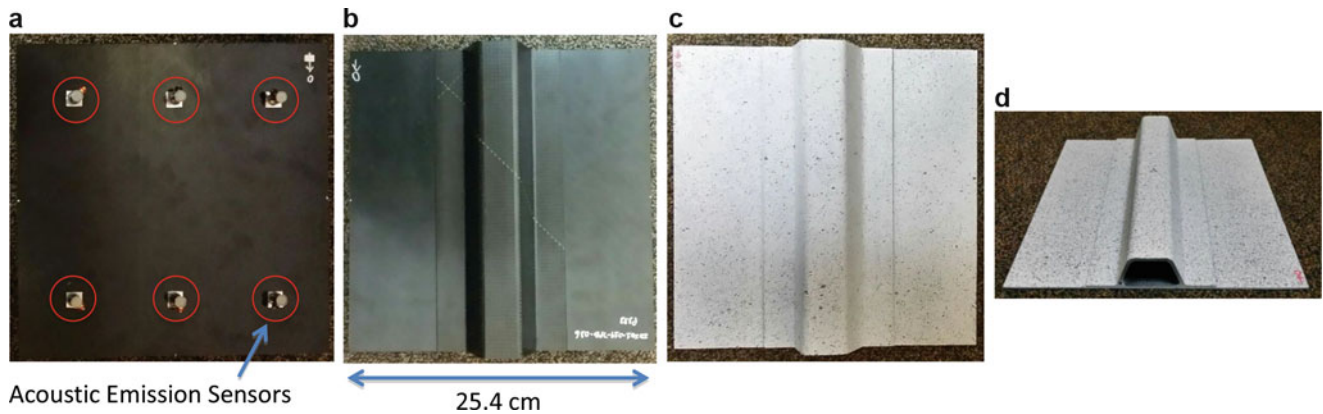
Single stringer composite panel with acoustic emission sensor locations. (a) Flat side, (b) Stringer side, (c) Stringer side (painted), (d) Cross sectional view
